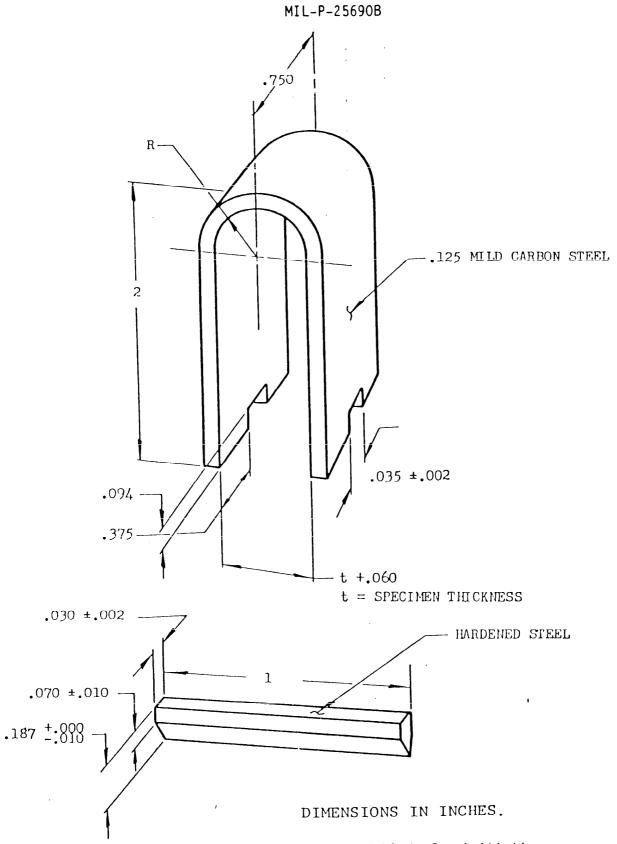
<u>Driving wedge and blade for initiating cracks in toughness specimens</u>
